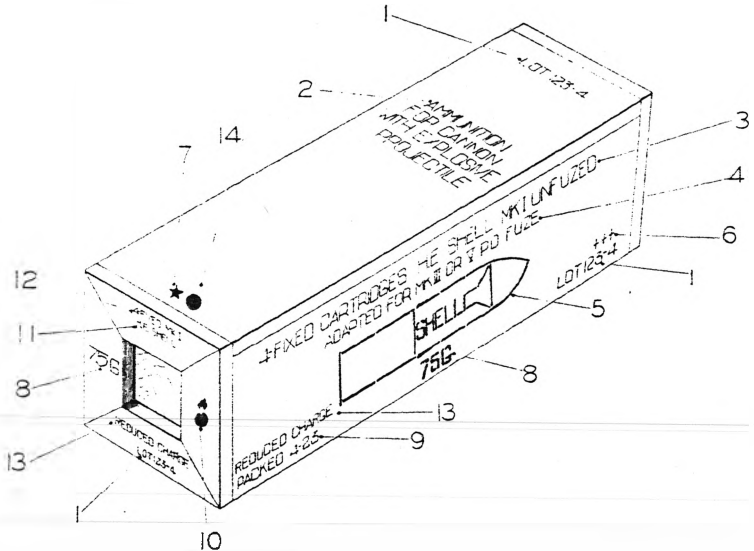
Packing box for 75-mm. high-explosive fixed ammunition for field gun
